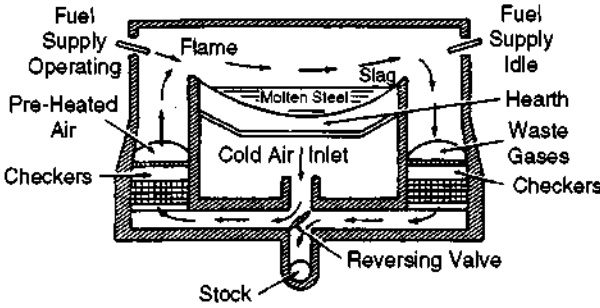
A6 Sectional-view of an open-hearth furnace. (Courtesy Steel Founders' Society of America, Barrington, Illinois)
